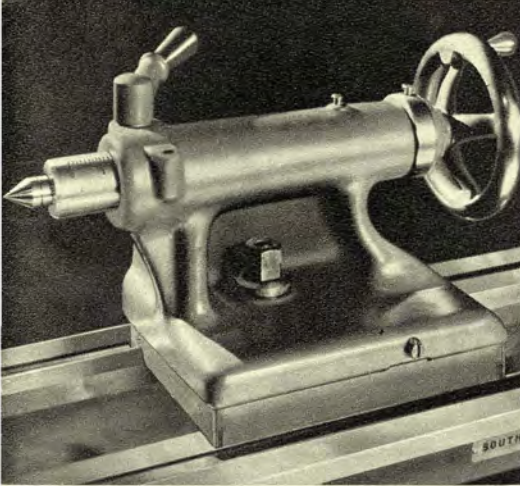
Tailstock Design Used on 13" and Larger Lathes
